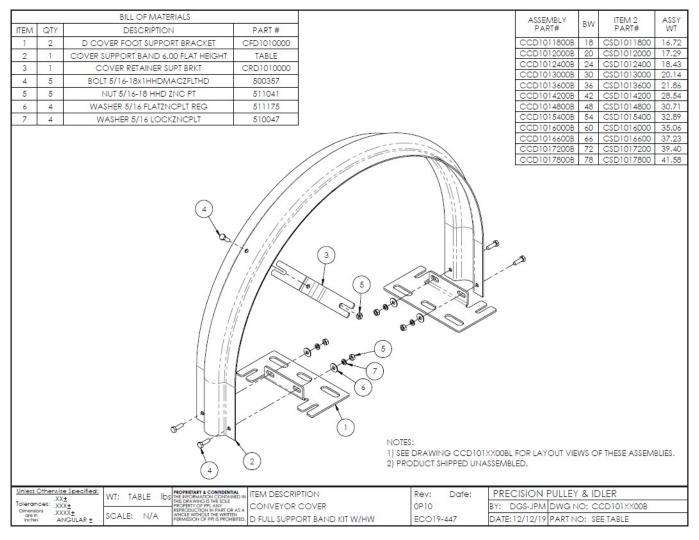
D FULL COVER SUPPORT BAND ASSEMBLY WITH LIST OF COMPONENTS
